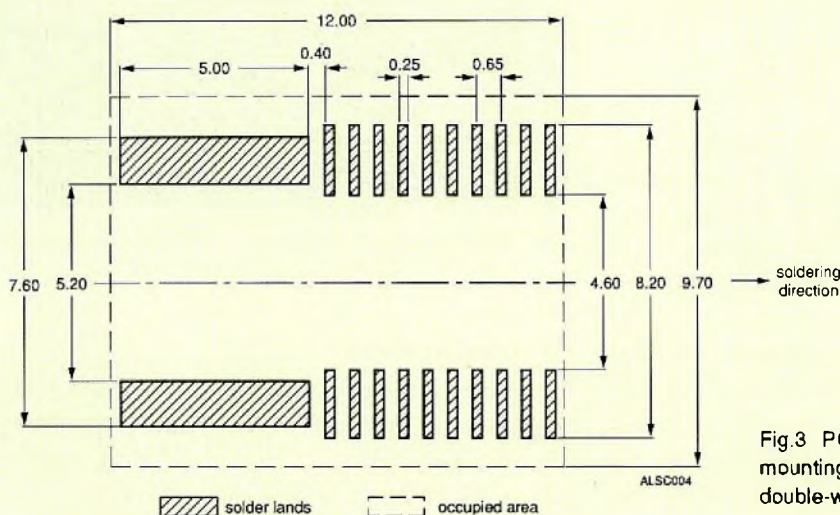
PCB footprint dimensions (in mm) for mounting an SSO-20 package on a PCB for double-wave soldering
